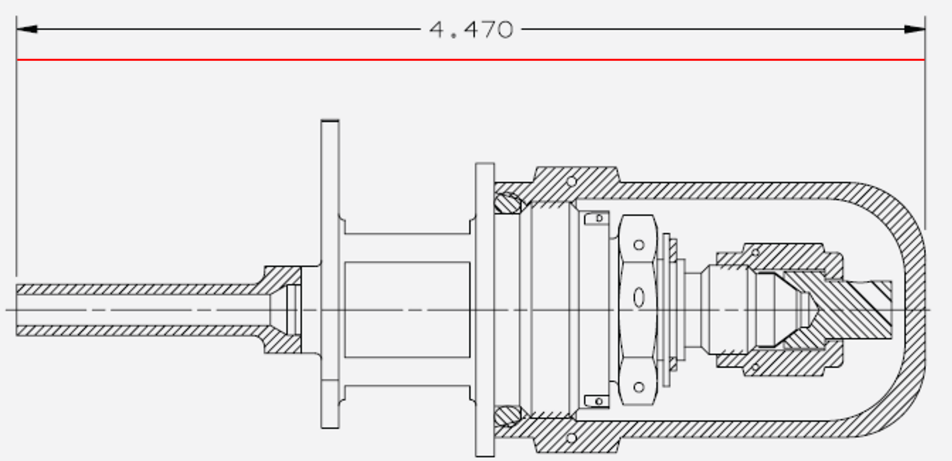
Top view technical drawing of 1 N HPGP thruster developed by ECAPS [198]. Reference dimension is flow control valve length, equal to 103 mm.
